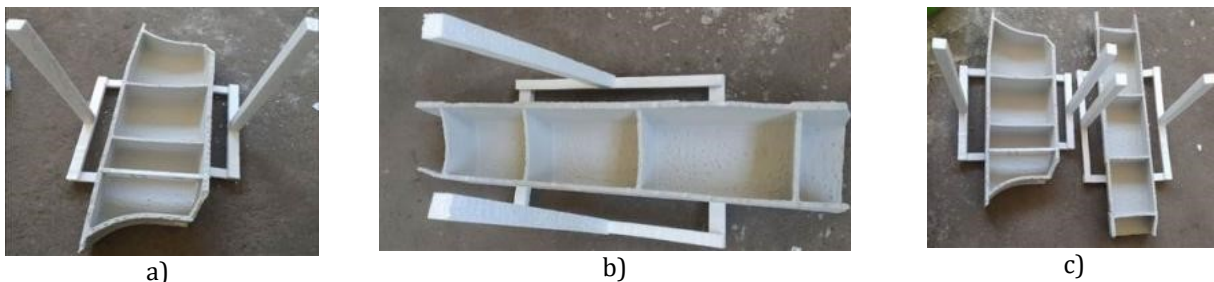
Models prepared for casting in a vacuum mold based on a drawing a) SP-1037 is a model of a raised roof detail based on the drawing b) SP-1033 is a model of a raised window detail based on the drawing c) models of lifting roof details based on drawings SP-1037 and SP-1033
